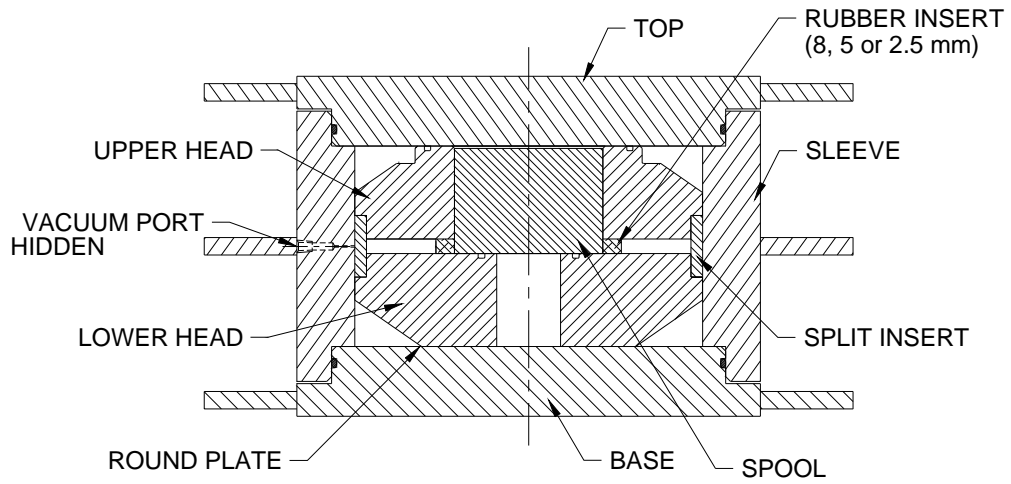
Schematic of Small-Scale Test Specimen Mold Design
